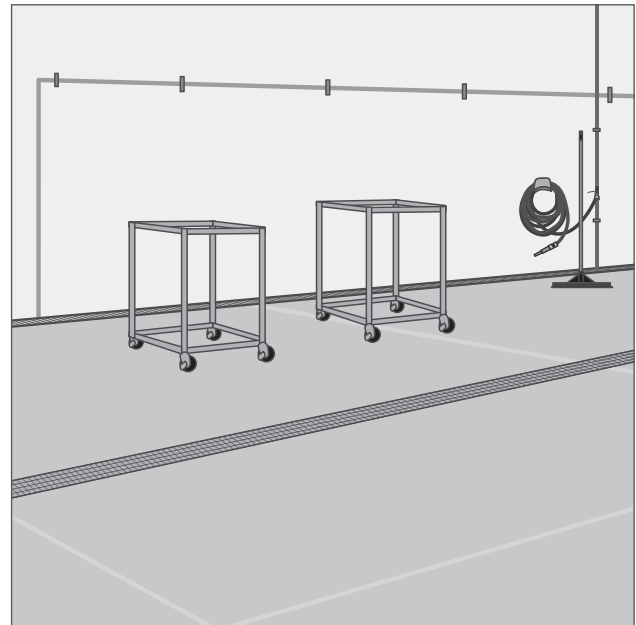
Effective workplace design to capture water run off, with in-built drains and floor bunding
